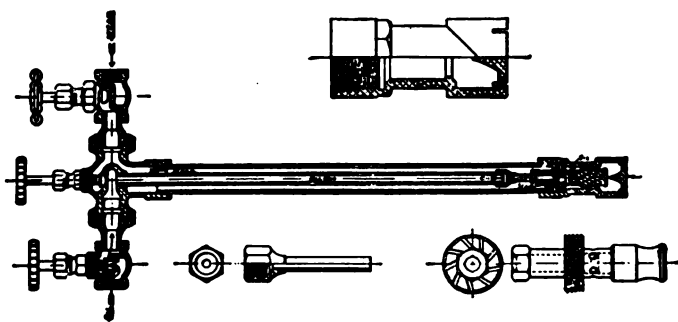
Here is shown a Witt inside mixing burner for front firing.
